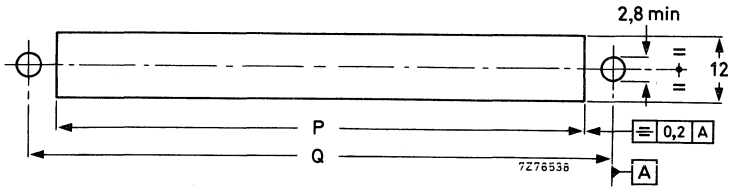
Panel cut-out for the male part; see Table 4 for dimensions P and Q.
